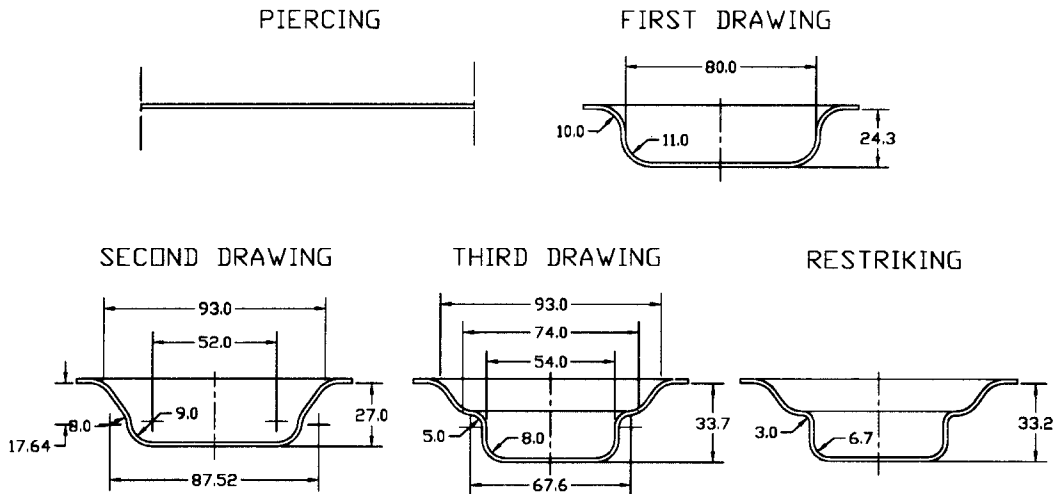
Sequence drawing for the deep drawing parts of the "Clutch Housing"—Industrial practice
